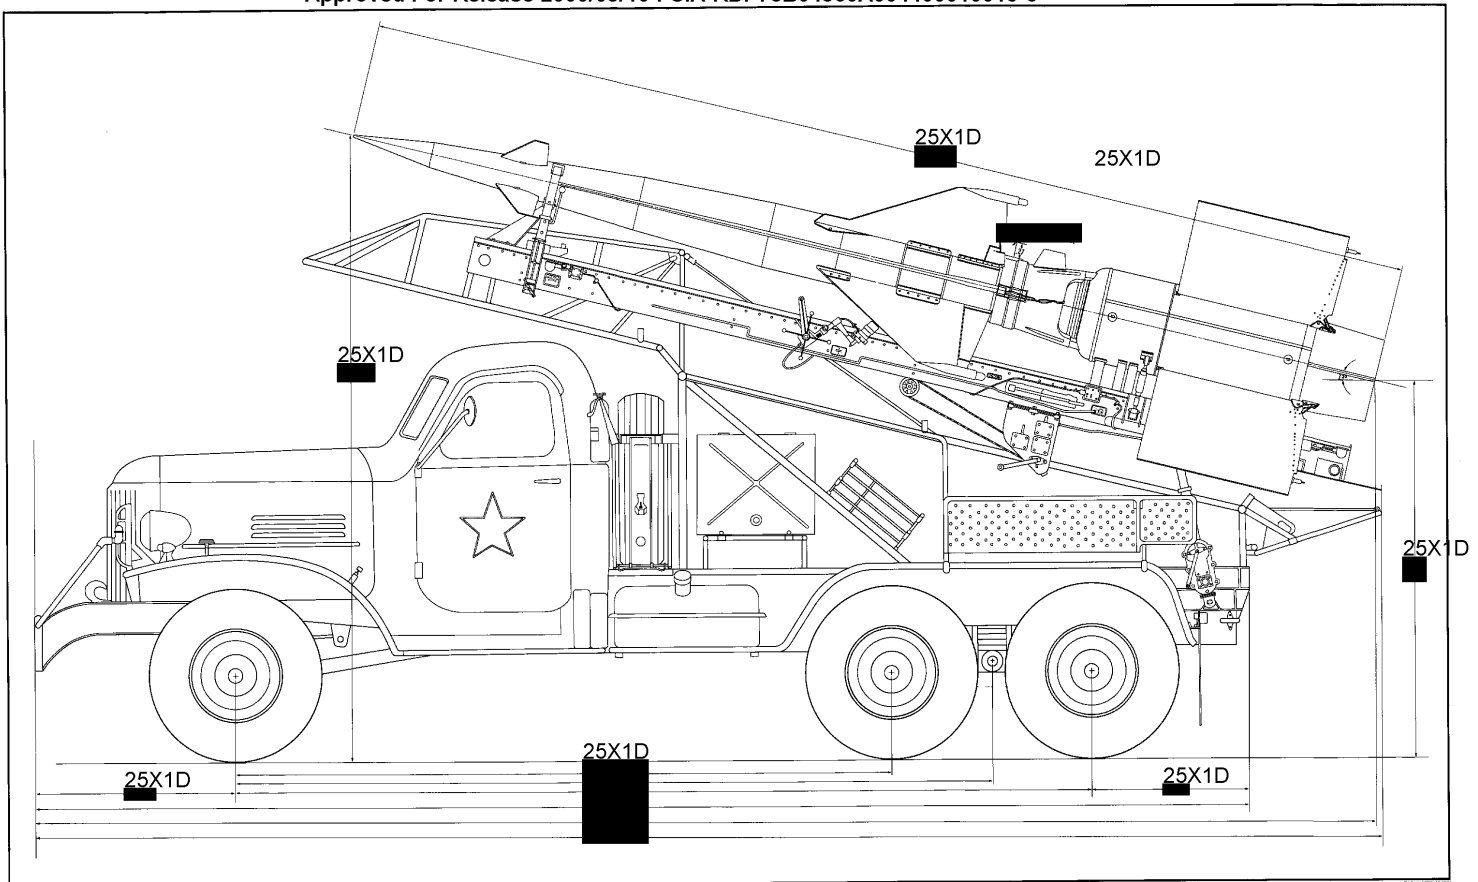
DIMENSIONAL DRAWING OF THE GOA BEING TRANSPORTED.
